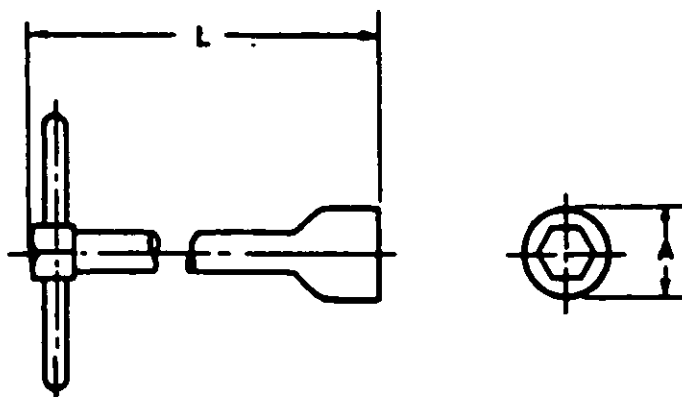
Type I, class 2 wrenches, socket tee-handled.
